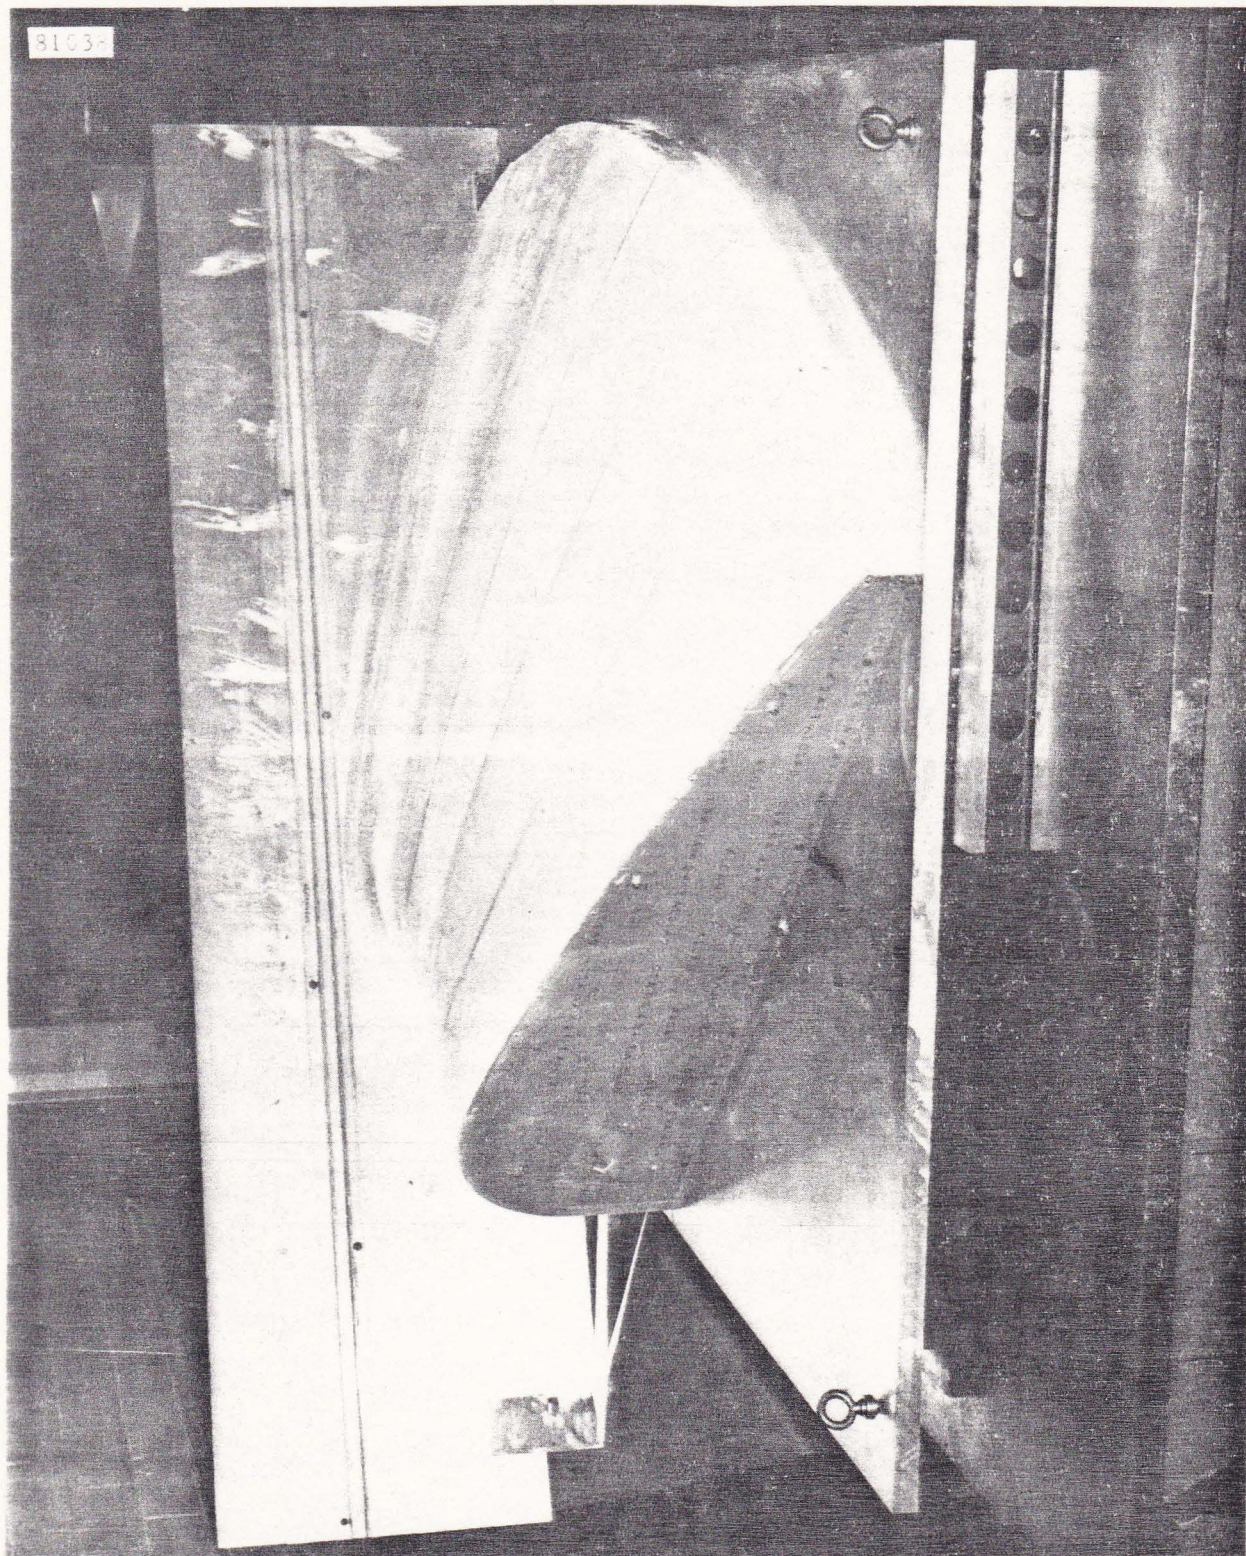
MASTER MODEL FOR UPPER SKIN SURFACE OF THE INNER WING
